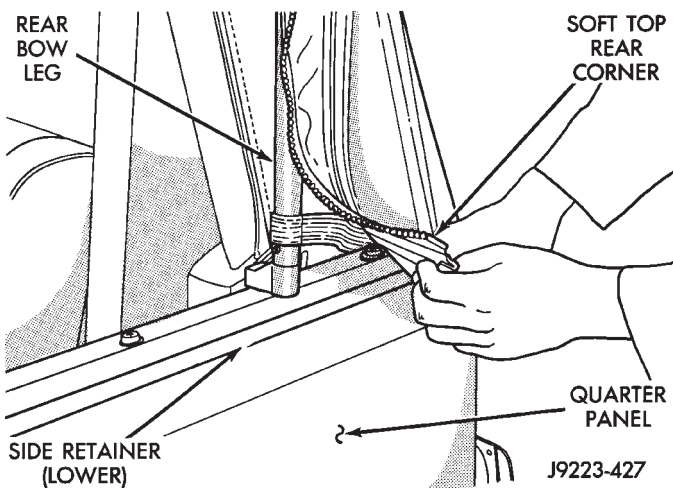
Detaching Rear Corner Side (Lower) Retainer
